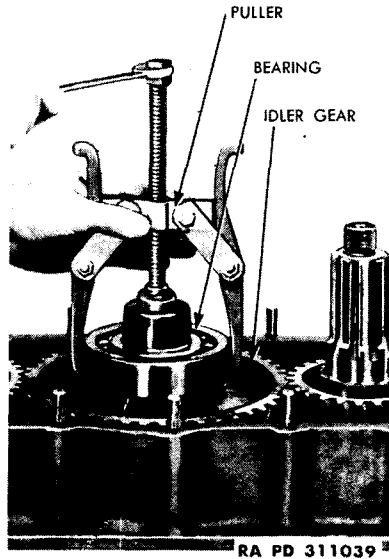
Removing Transfer Case Idler Gear Bearing, Using Puller 41-P-2911
